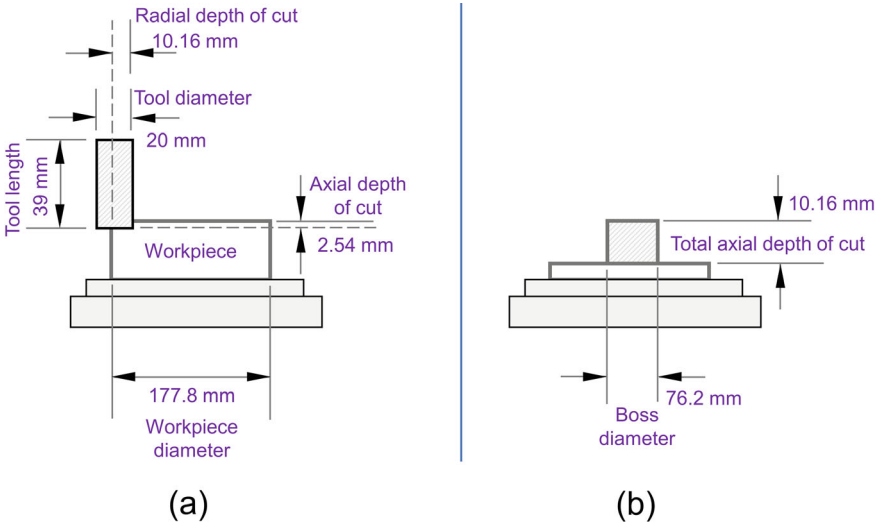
Schematic of cutting specifications: a before machining and b after machining
